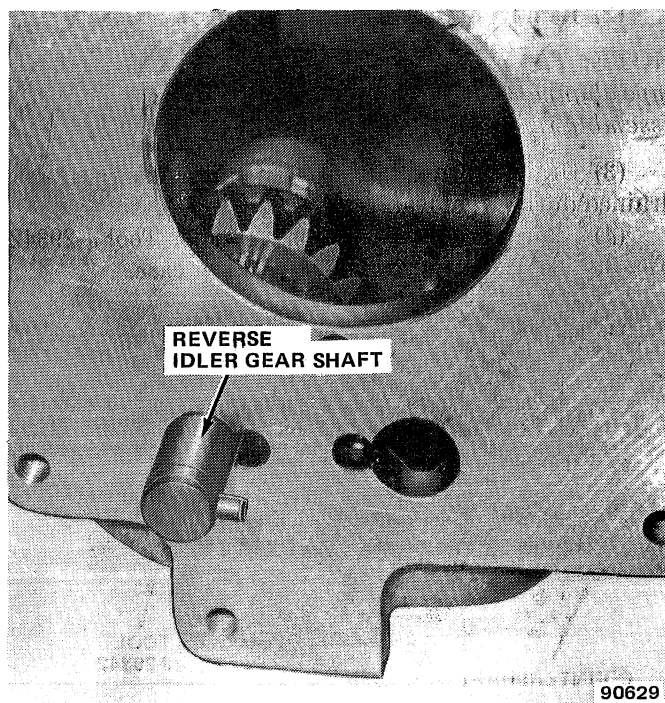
B-57 Reverse Idler Gear Shaft Removal/Installation
